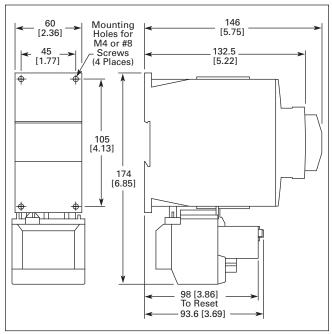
Frame D, XTAE040D – XTAE065D Starters with XTOB (40 – 65A) — Approximate Dimensions in mm [in.]
